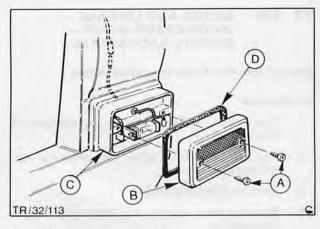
A - Screws C - Lamp B - Lens D - Gasket
